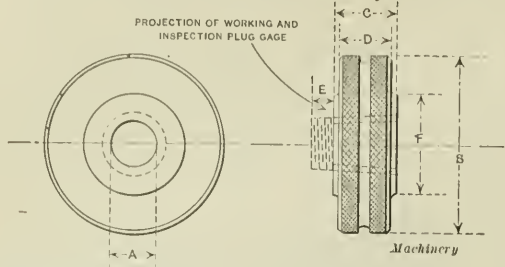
Tools and Gages used in machining and gaging Pipe Fittings to Briggs Standards
